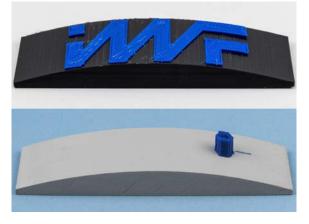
Base workpiece examples printed by a commercial 3D-printer (black/grey) with blue structures added by CAD/CAM-driven partial additive manufacturing using HEXA II.
